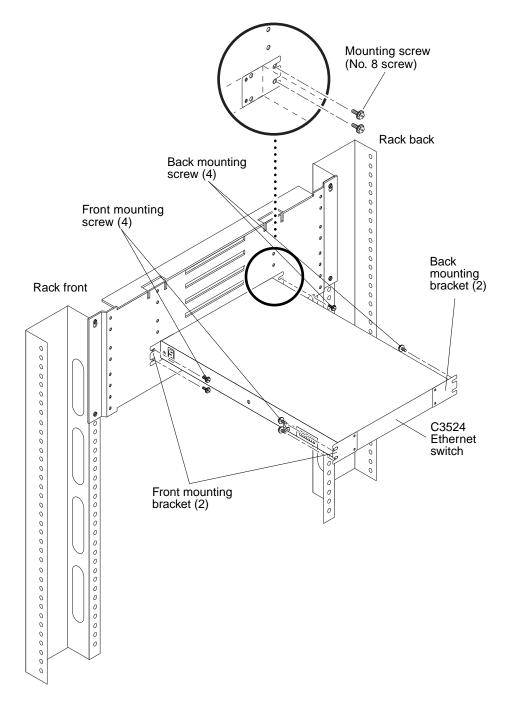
Removing and Replacing the C3524 Ethernet Switch
